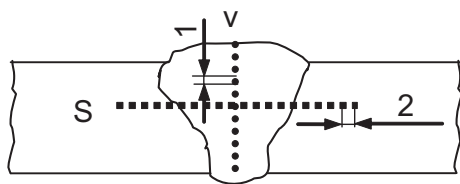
Layout of measuring points for hardness testing of welded joints
